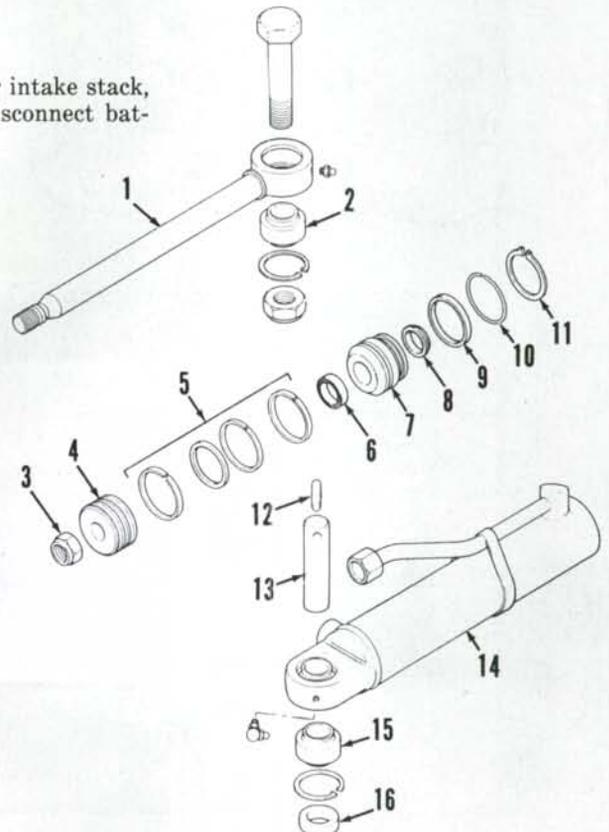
Exploded view of second type steering cylinder used on Model 1690 tractors. Note differences in end cap and seal design from cylinder shown in Fig. 67.
